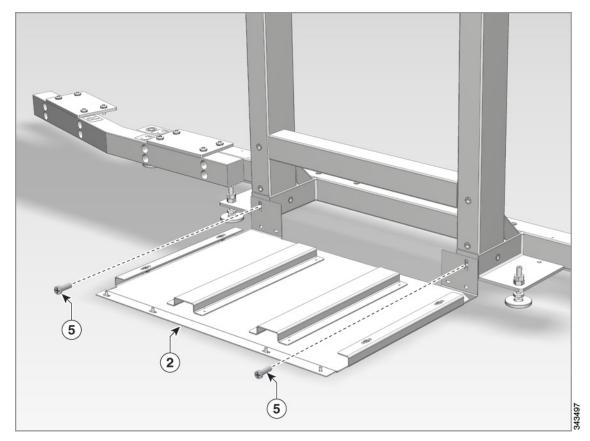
Attaching the Center Floor Bracket (3 of 3)—Screw Detail
